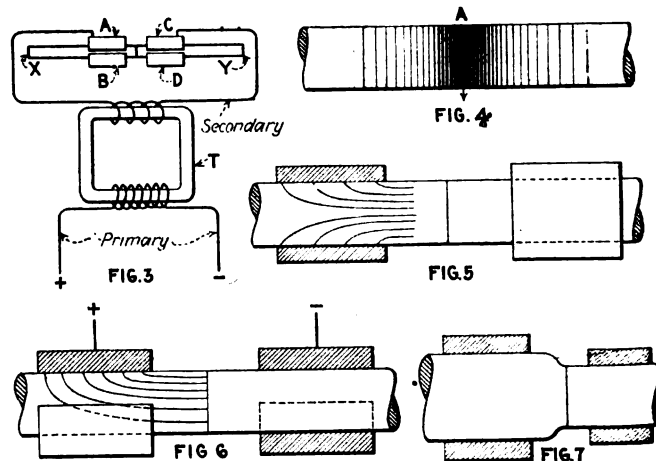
DIAGRAM OF THE ESSENTIAL ELEMENTS OF A RESISTANCE WELDING MACHINE. FIG. 4—DIAGRAM SHOWING JOINT DISTRIBUTION OF HEAT WHEN TWO PIECES ARE BROUGHT TOGETHER IN WELDING MACHINE. FIG. 5—DIAGRAM SHOWING PATH OF CURRENT WHEN PIECES ARE SURROUNDED BY DIES. FIG. 6—DIAGRAM SHOWING UNEQUAL RESISTANCE WITH ONE FLAT AND ONE CURVED DIE. FIG. 7—TWO PIECES OF UNEQUAL DIAMETERS HELD IN WELDING MACHINE.
